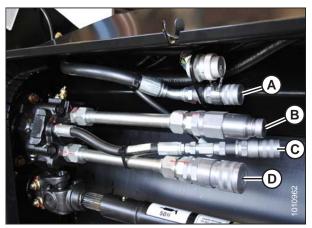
Hose Connections on Standard Header – 18-Ft. Header Shown
